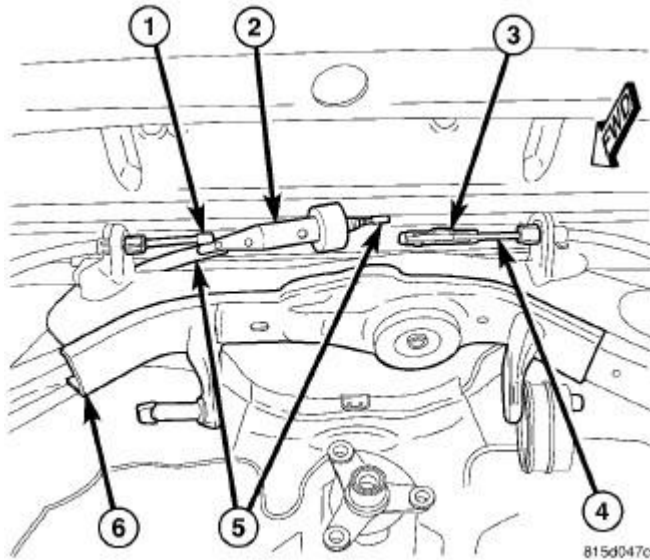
PARKING BRAKE CABLES AT REAR CROSSMEMBER
